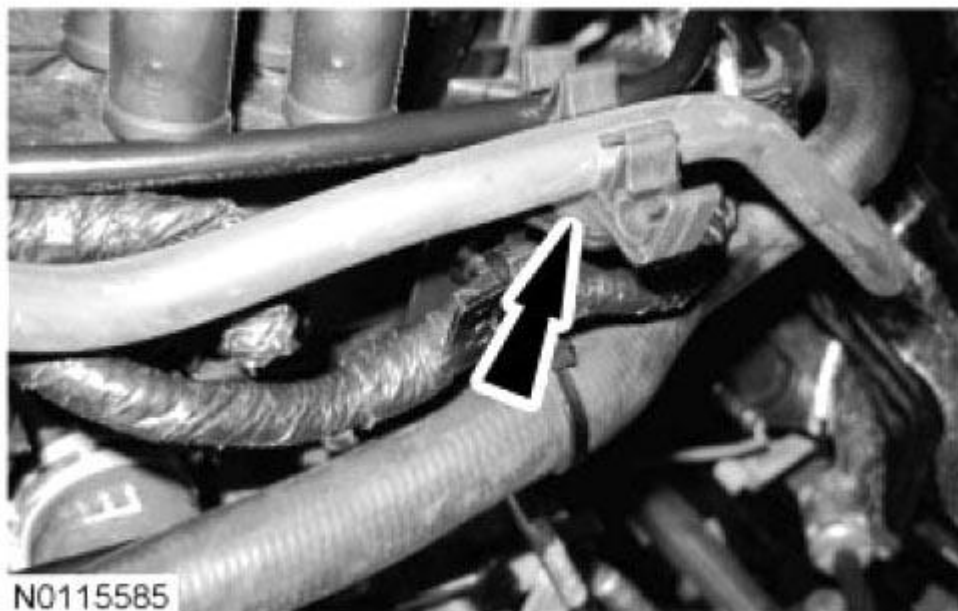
Locating Fuel Tube To Coolant Outlet Bracket Retainer
